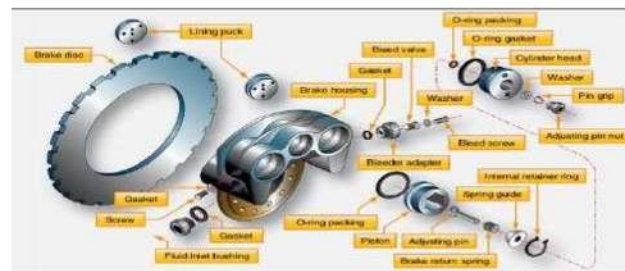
An exploded view of a single-disc brake assembly found on a light aircraft.
